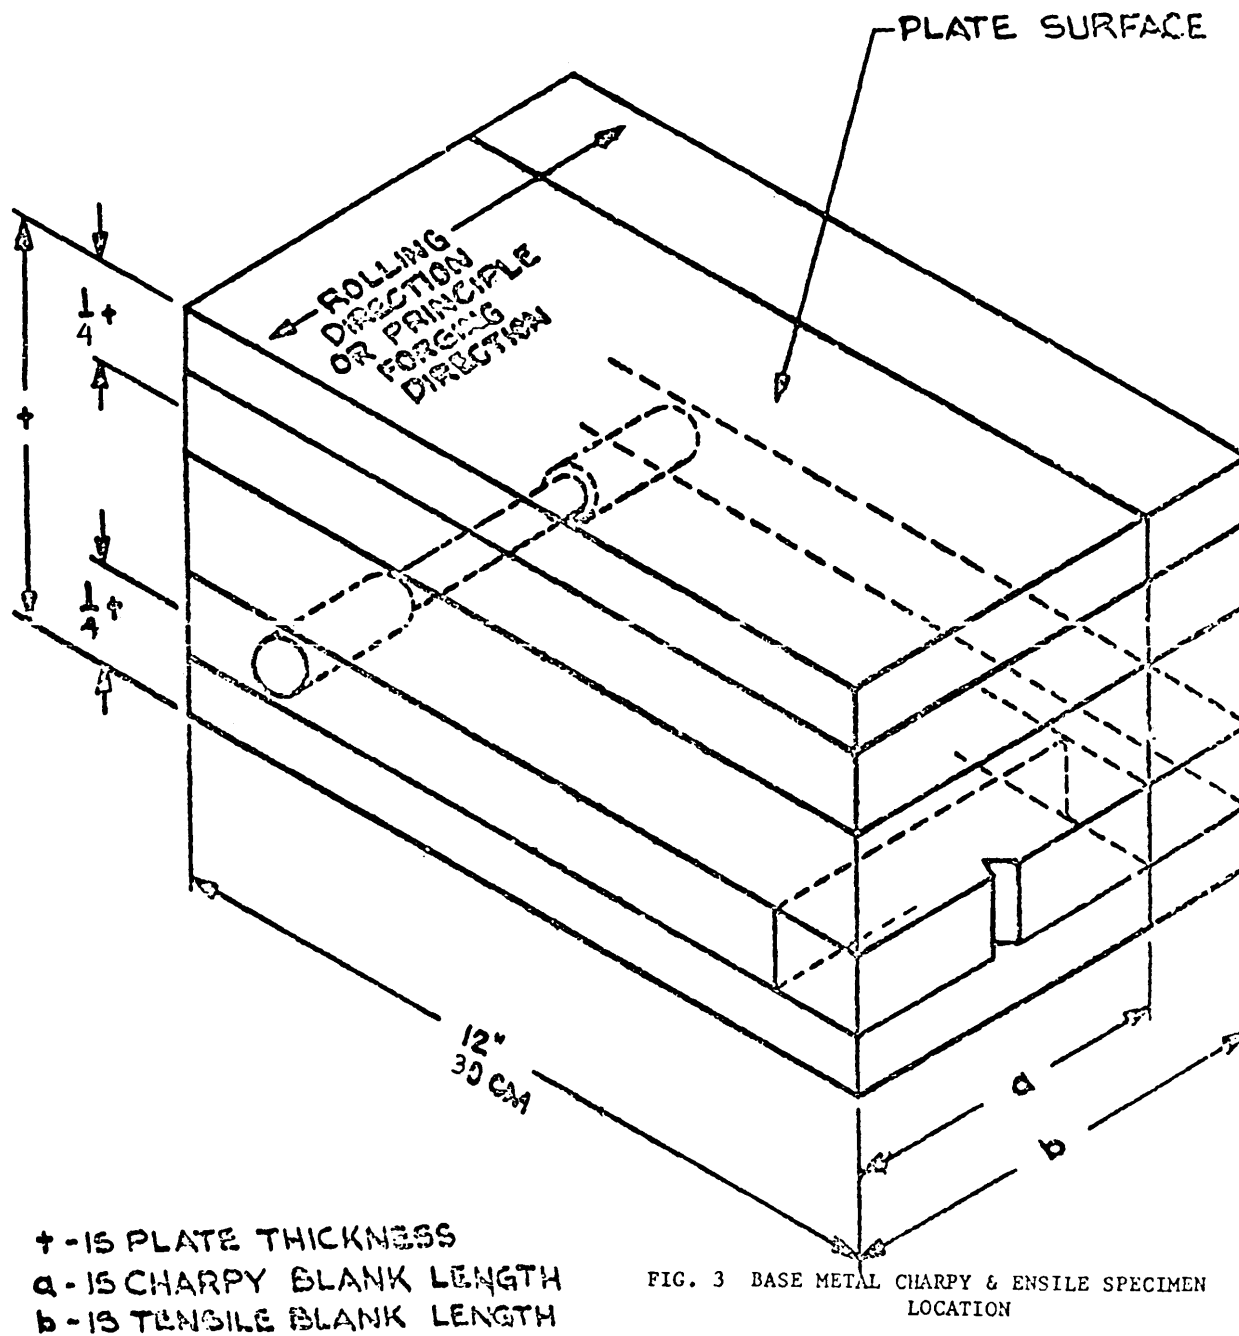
BASE METAL CHARPY & ENSILE SPECIMEN LOCATION
